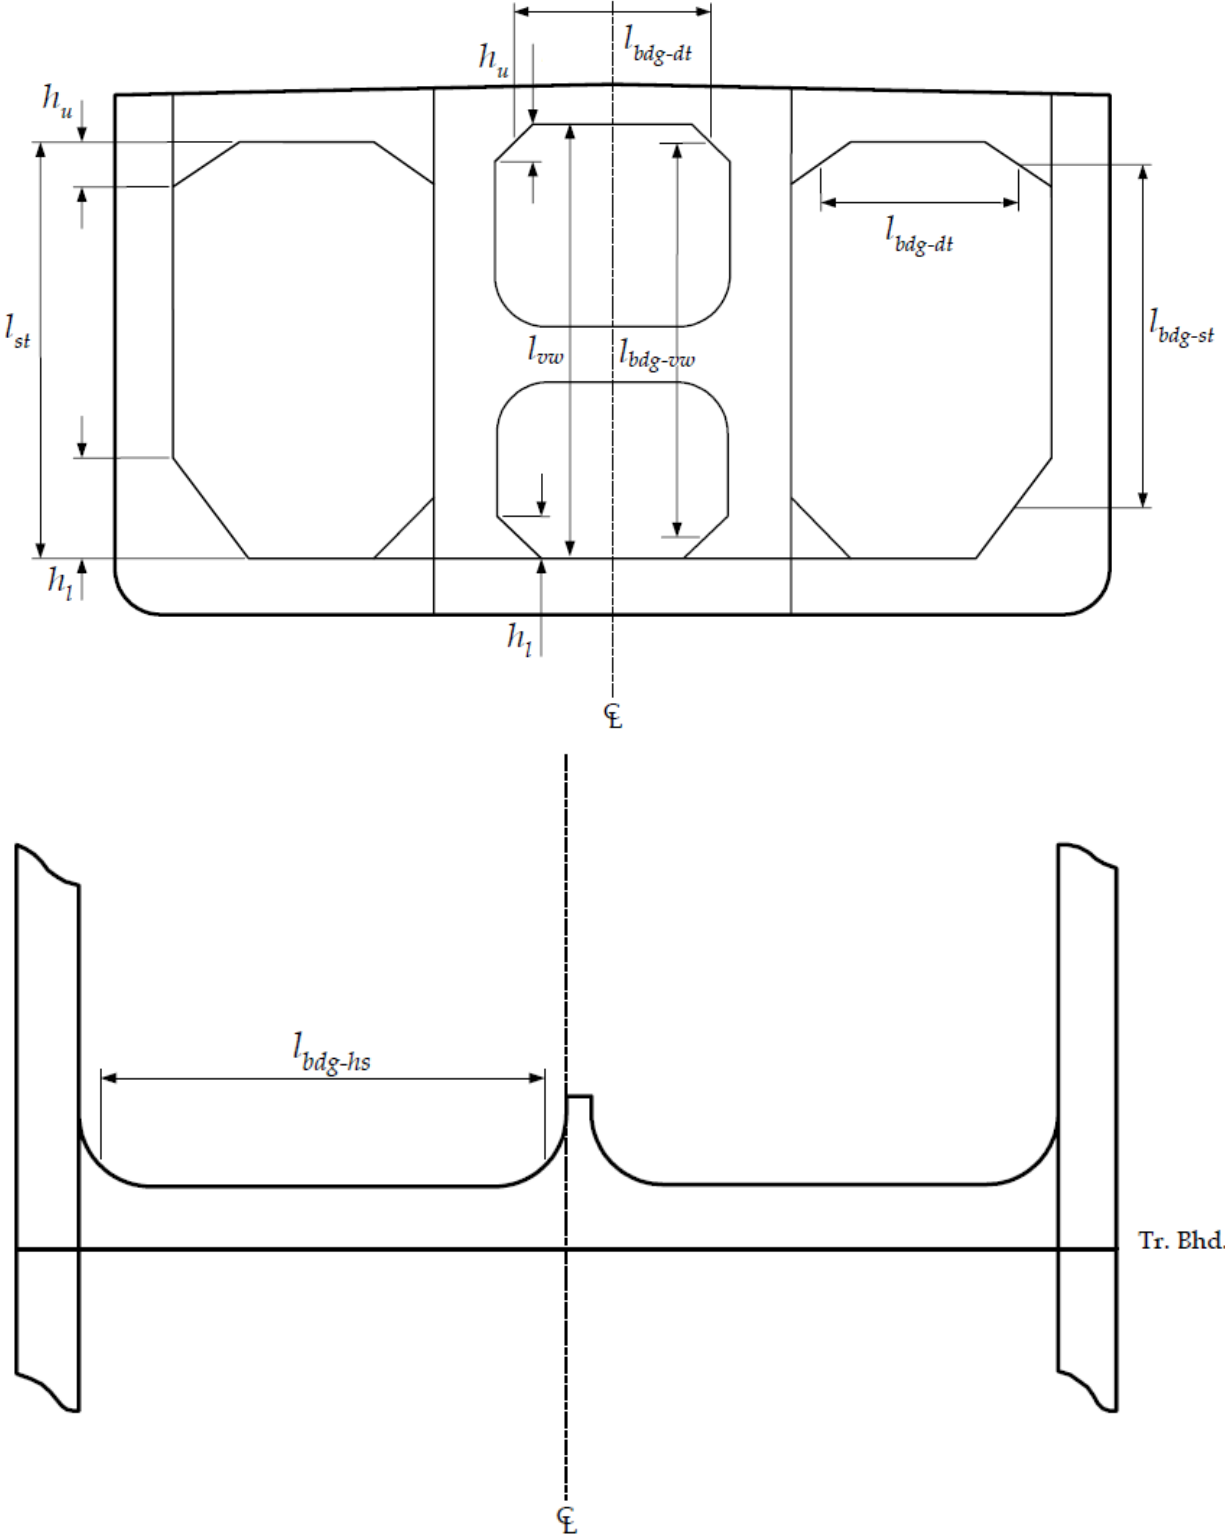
(continued): Definition of spans of deck, side transverses, vertical webframes on longitudinal bulkheads and horizontal stringers on transverse bulkheads
